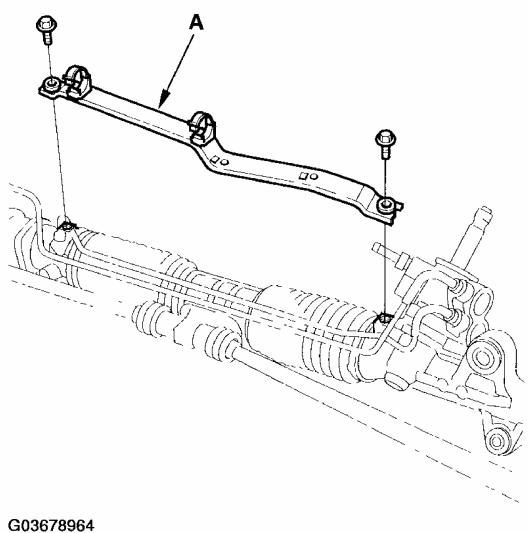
Removing P/S Line Mounting Bracket Courtesy of AMERICAN HONDA MOTOR CO., INC.
